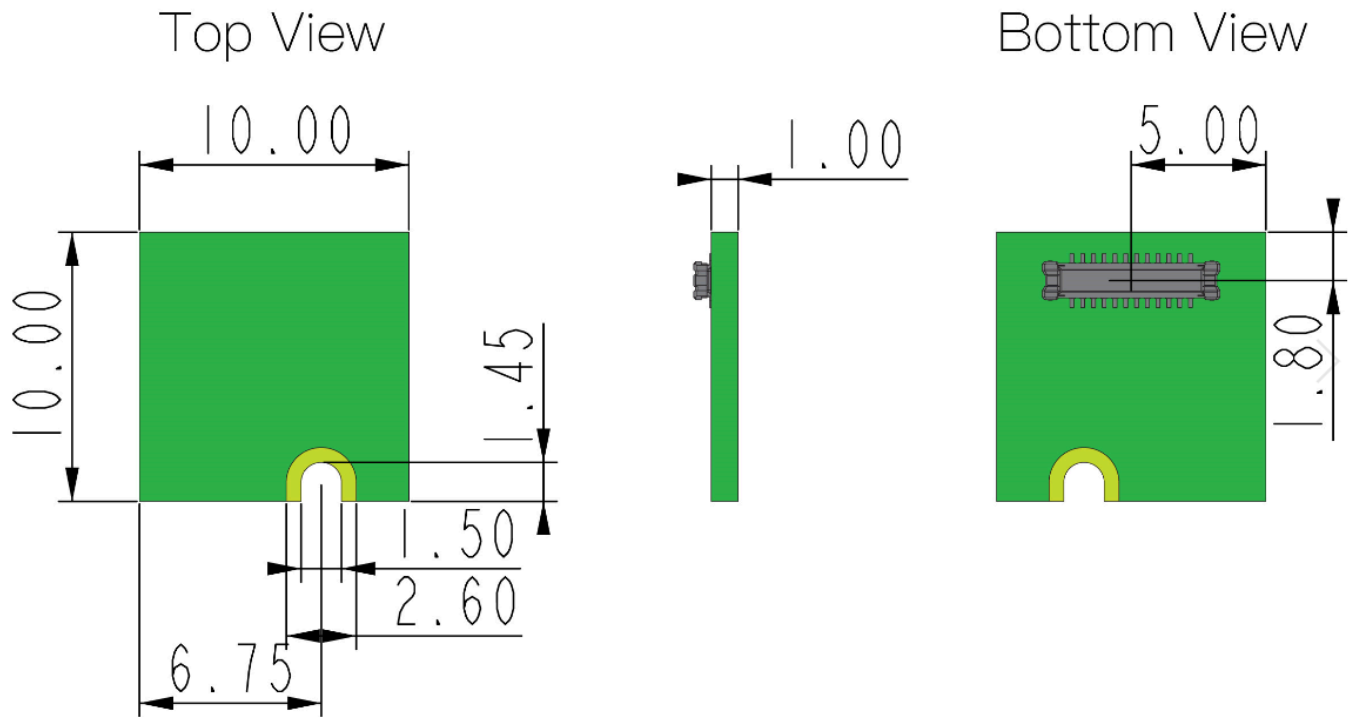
RAK15005 WisBlock 128kByte FRAM Module Mechanic Drawing
